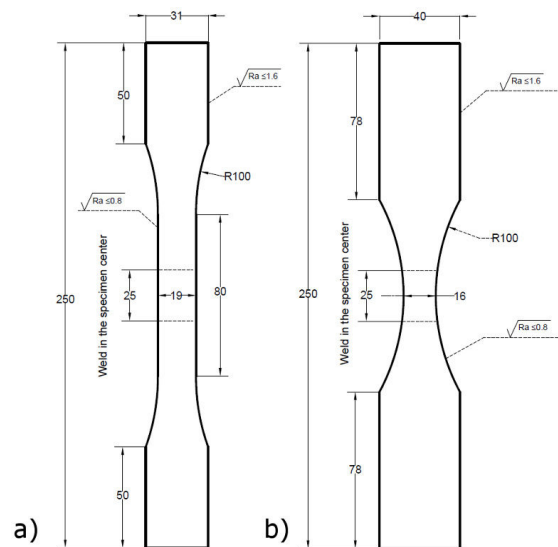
Specimen geometry for a) static and b) fatigue testing.
